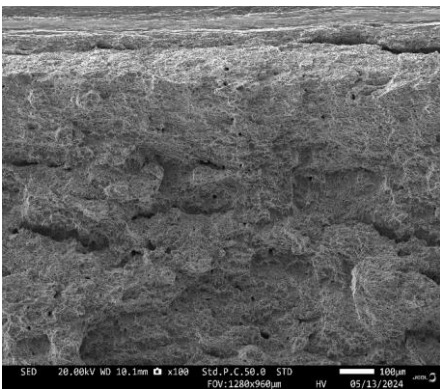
FCB-M4 near fracture surface, ductile.
